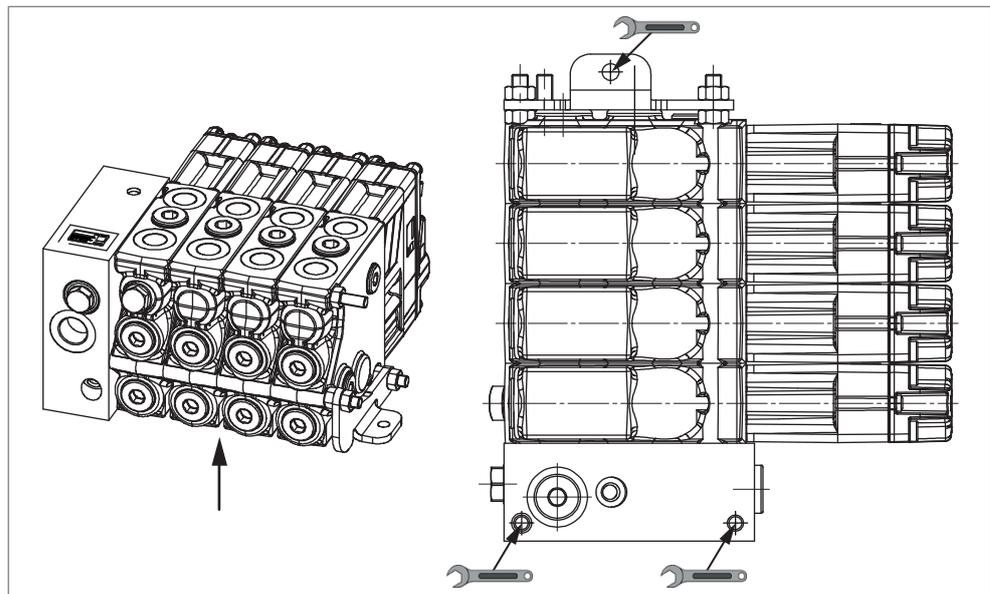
Control block mounting, example with AP and EVR with mounting bracket
